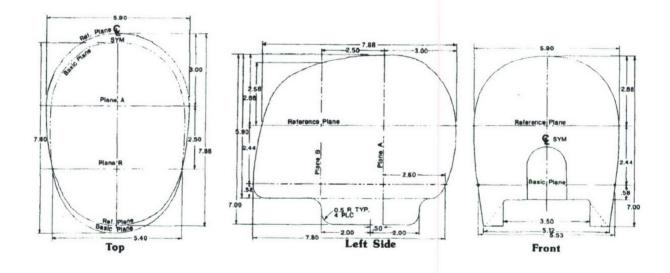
Modified medium headform dimensions. All dimensions are in inches.
